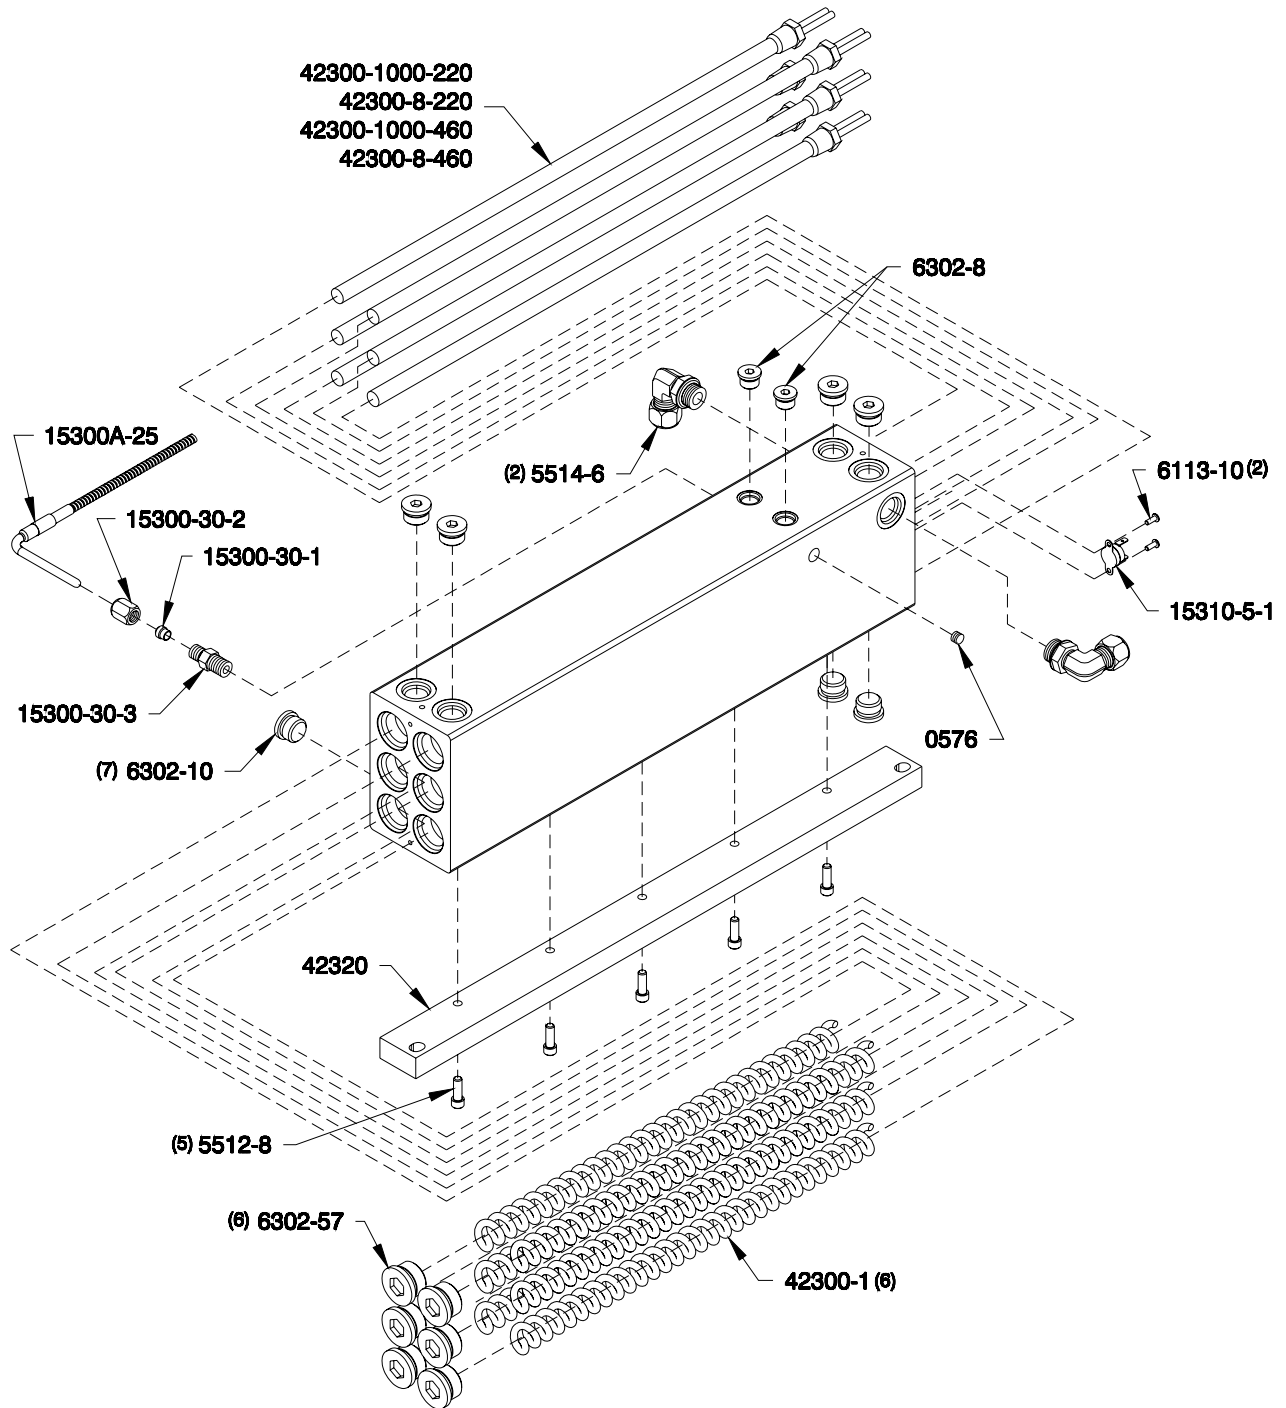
R-Primary Heater Assembly (Part No. 42330-SIZE, 42320-230-9KW, & 66300-460), Exploded View
